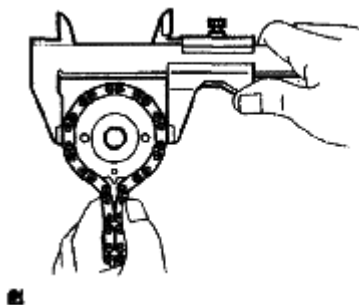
Inspecting Oil Pump Drive Shaft Gear
